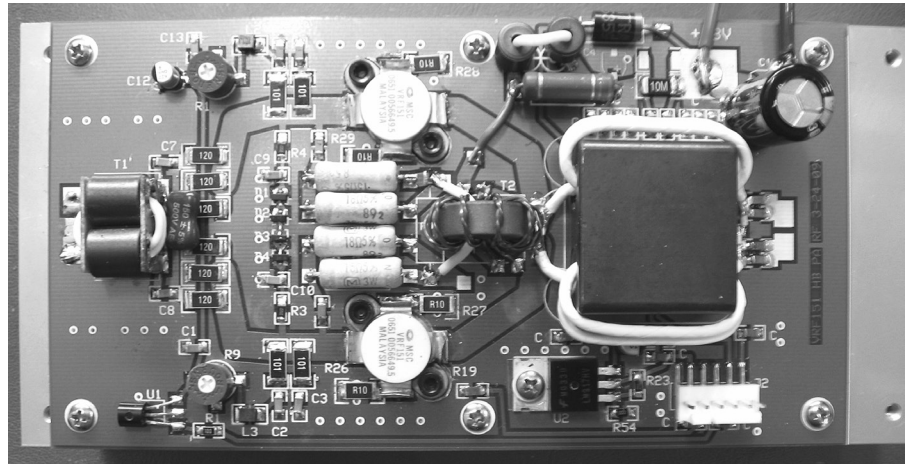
The power amplifier module PC board assembly mounted on the heat sink.
